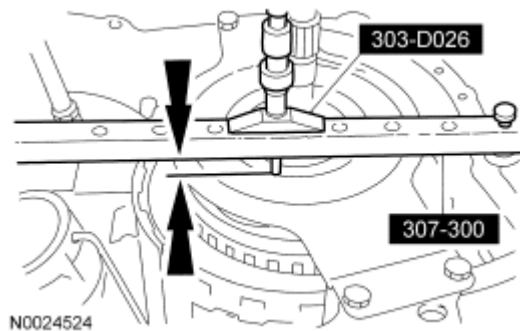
Measuring Distance From Top Of Special Tool To Bearing Surface On Reverse/Overdrive Carrier Assembly
